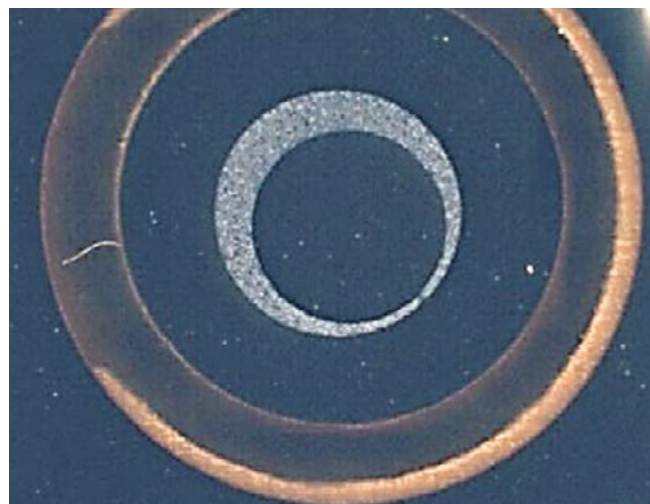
In-plane section of a failed PCB showing fiber contamination in a clearance of a plated through-hole.
